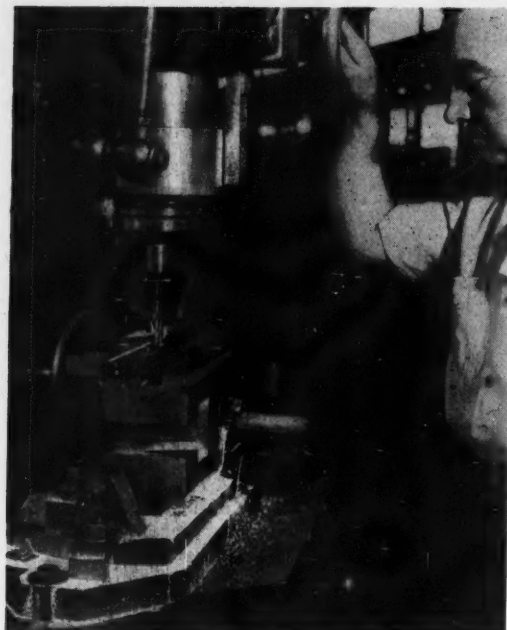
Milling Cocking Lever Slot in Breech Ring for 90 MM Gun
